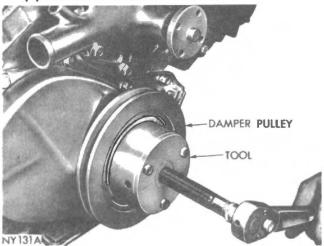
Removing damper pulley assembly (Tool CA-3732).
